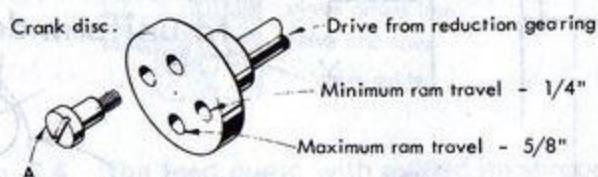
A pump-driving crank illustrated at about half-size. The crankpin, indicated by A, is screwed in at various radii
